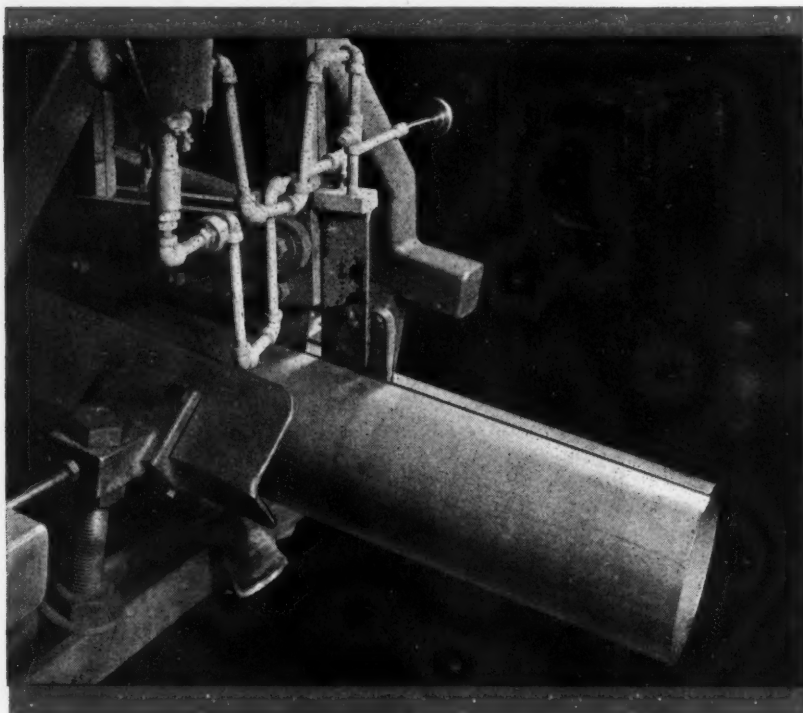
(Left) Close-up View of the Feeding End of a Welding Machine, Showing a Cylinder being Fed into It
